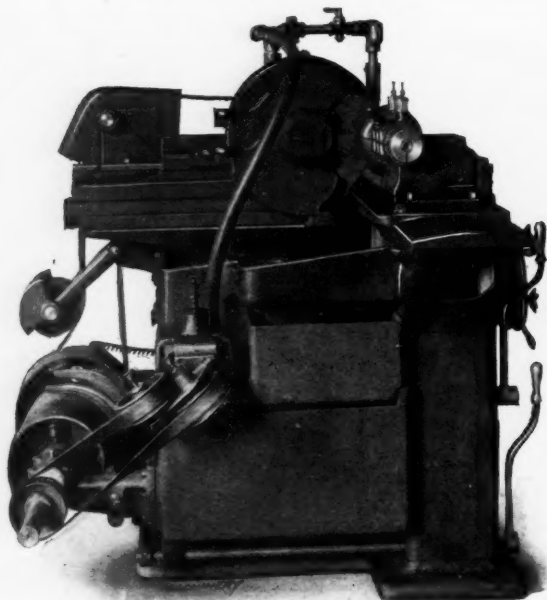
Modern 8- by 18-inch Grinder, showing Main Drive, Wheel Base and Pump
